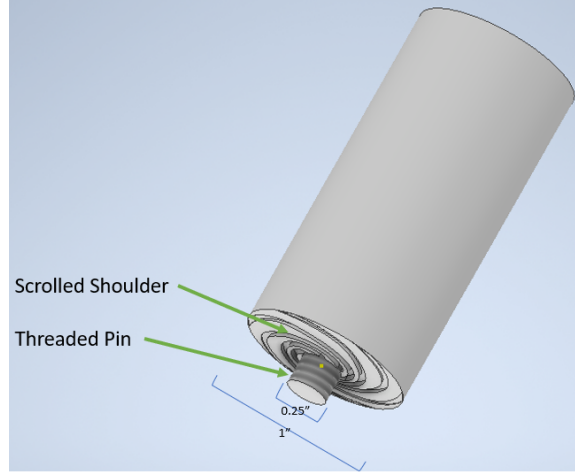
Model of FSP tool with 25 mm scrolled parabolic shoulder and 6 mm pin with left-hand 1.27 pitch threads. The tool is designed to rotate clock-wise.
